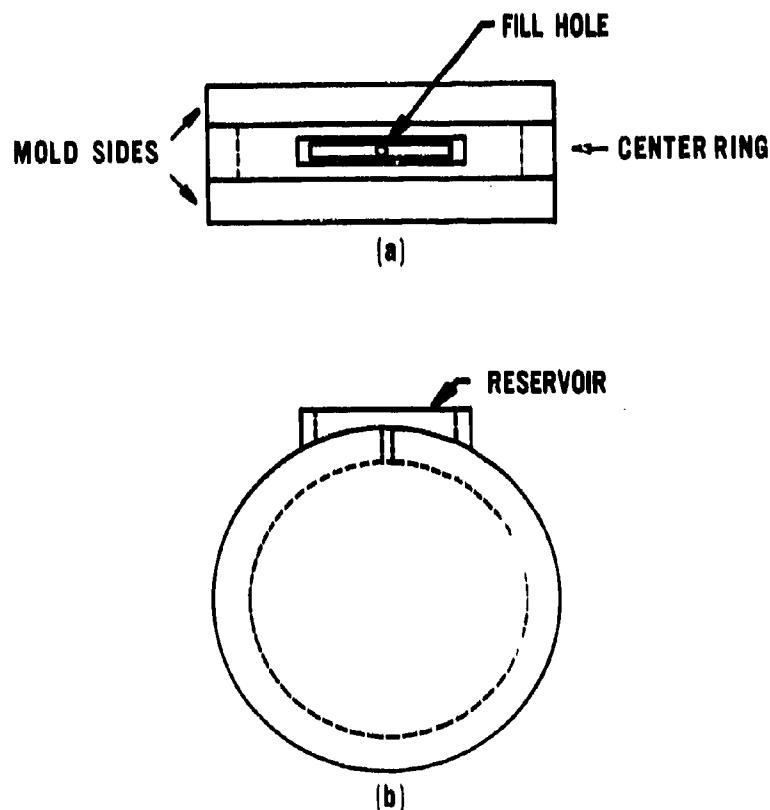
Mold for fabricating epoxy disks. (a) Top view. (b) Side view.
